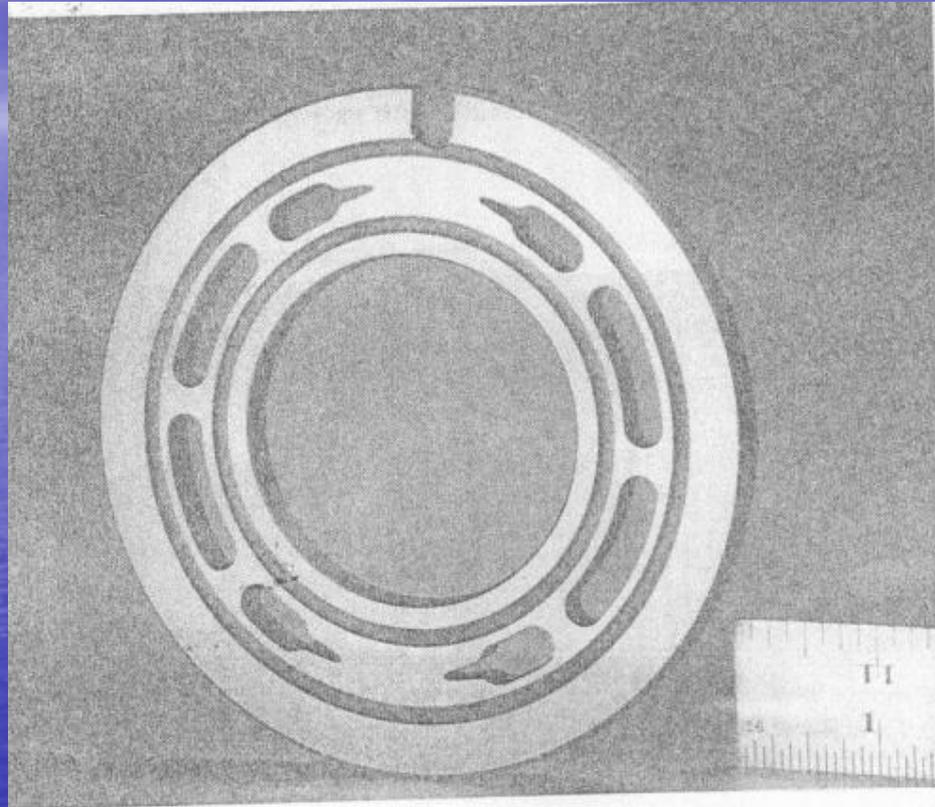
Electrochemically machined valve plate (Source: courtesy, Anocut, Inc., Elk Grove Village, Ill.).
